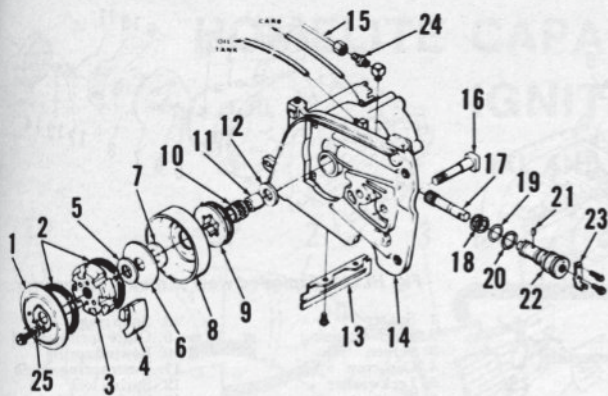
Exploded view of clutch and oil pump assemblies.
